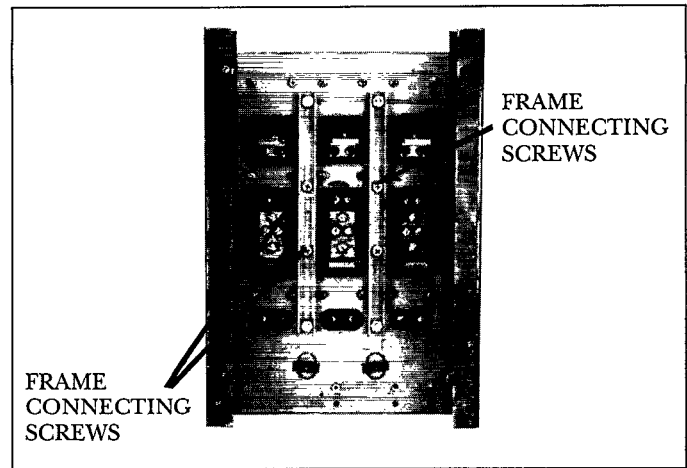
Screws Holding Breaker Front and Back Frames Together
